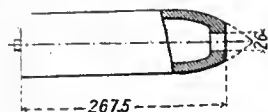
PART SECTION SHOWING HOLE BORED IN HEAD.
